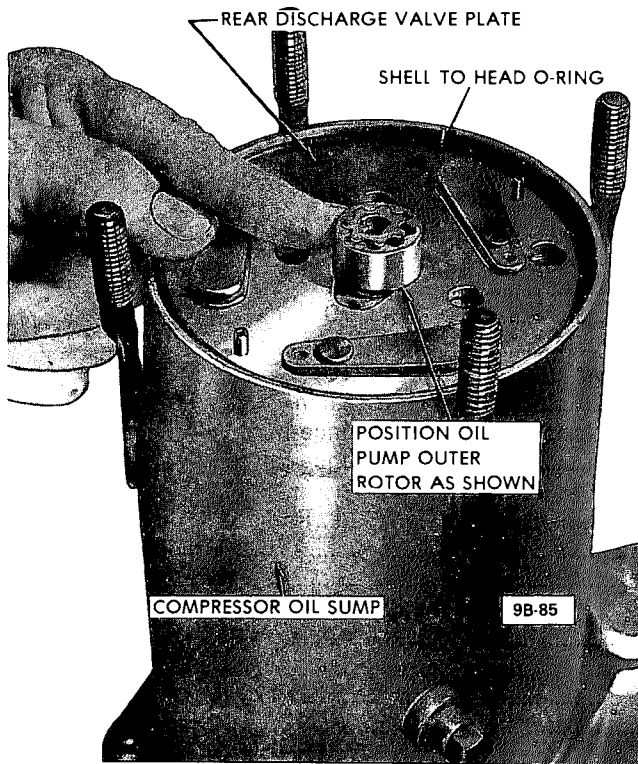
B-112 Positioning Oil Pump Outer Rotor - 6 Cylinder Compressor
